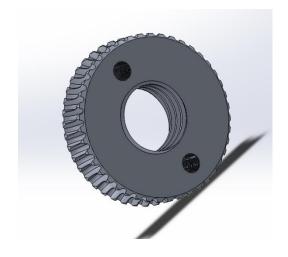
Threaded Worm Gear used in converting Rotational to Linear Motion
